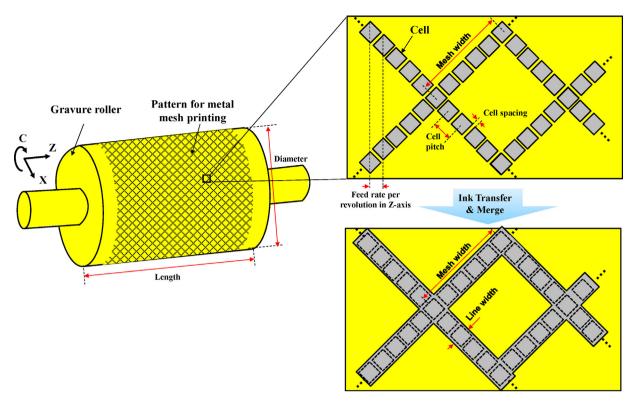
Gravure roller with a specified pattern for metal mesh printing.
